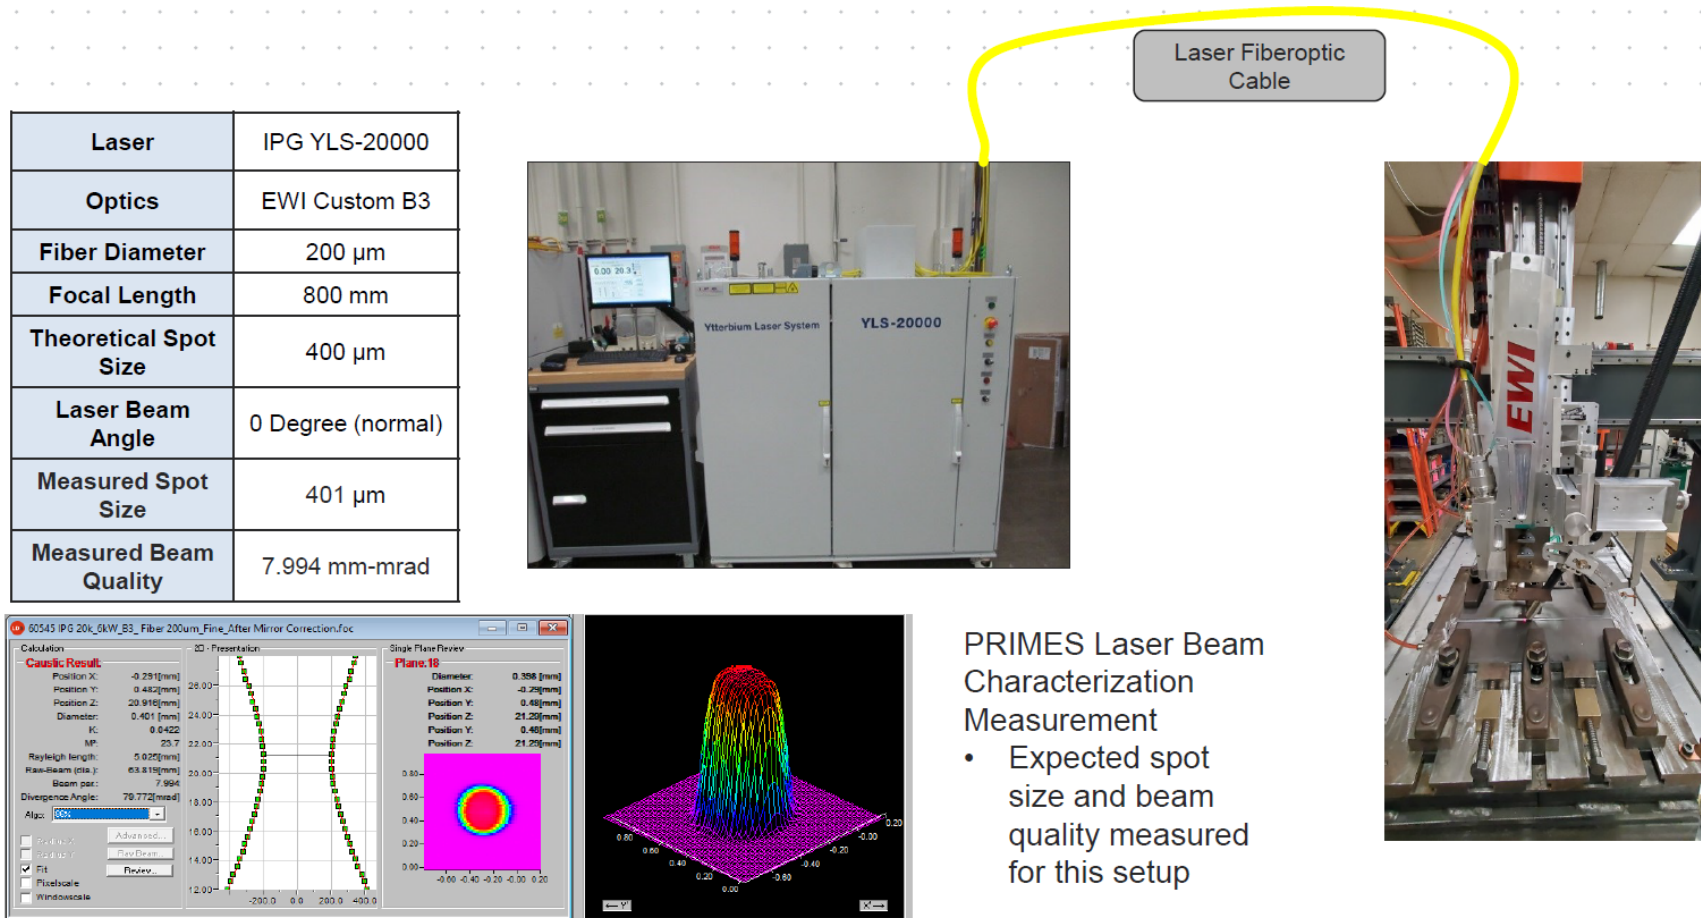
Laser Controls, Power Supply, and Fixturing to Weld Head
